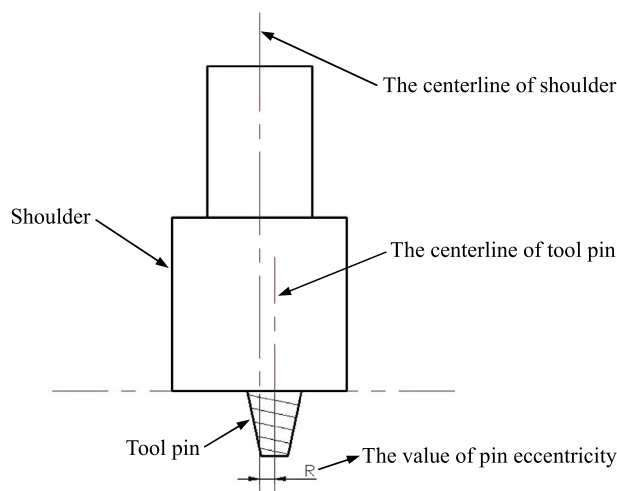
Diagrammatic drawing of tool pin eccentricity.
